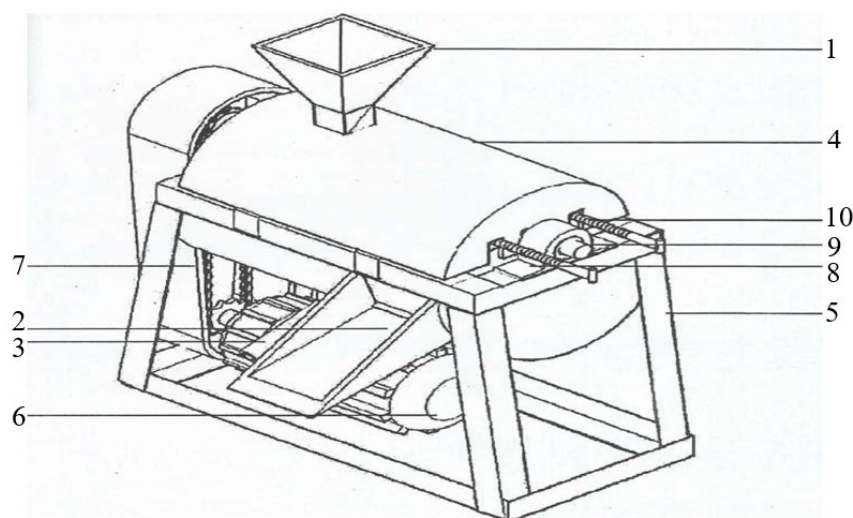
Designed and Fabricated Fruit Juice Extraction Machine
